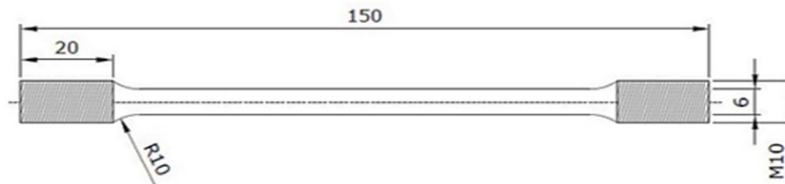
Schematic of the tensile specimens. Dimensions in mm.
